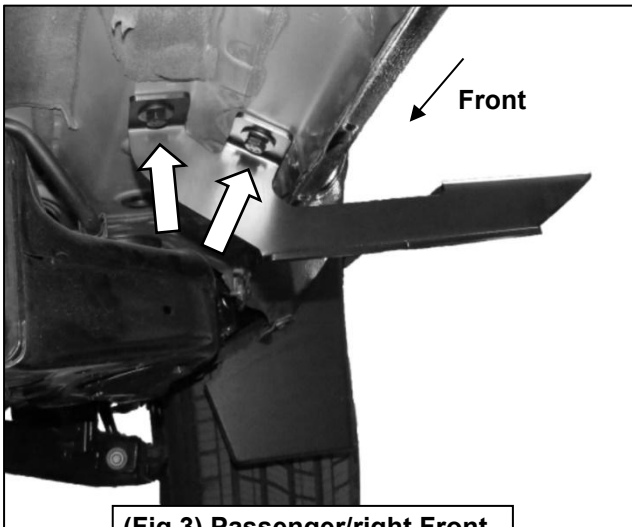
Attach Passenger/right Front Mounting Bracket to Passenger/right Front Mounting location
